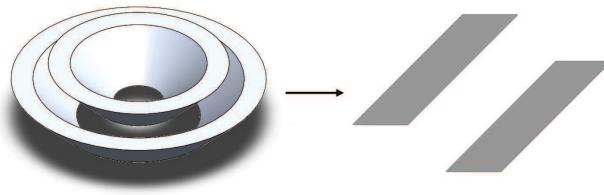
Operating principle showing a conic bearing as a wrapped version of angled slide/linear bearings.
